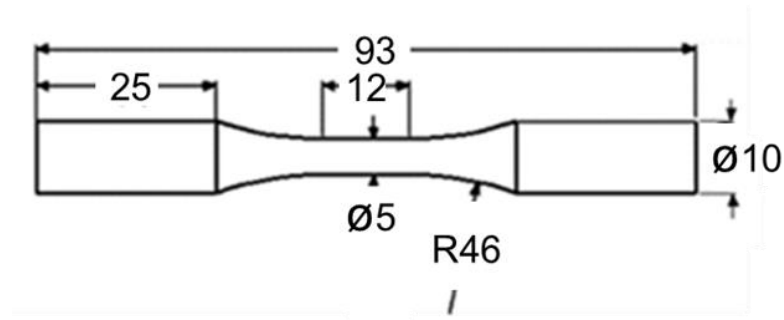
Geometries of fatigue L-PBF Ti-6Al-4V specimens. All the dimensions are in mm.
